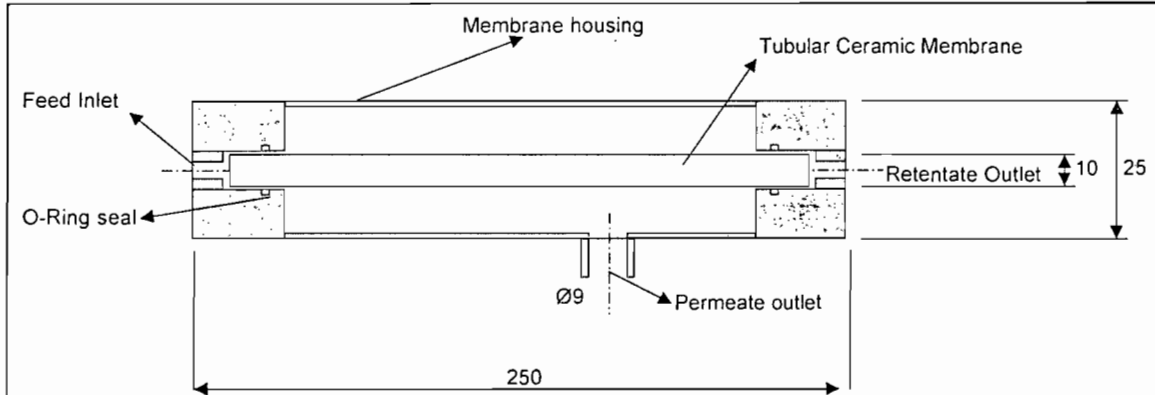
Mechanical drawing of the membrane housing. All units are in mm
